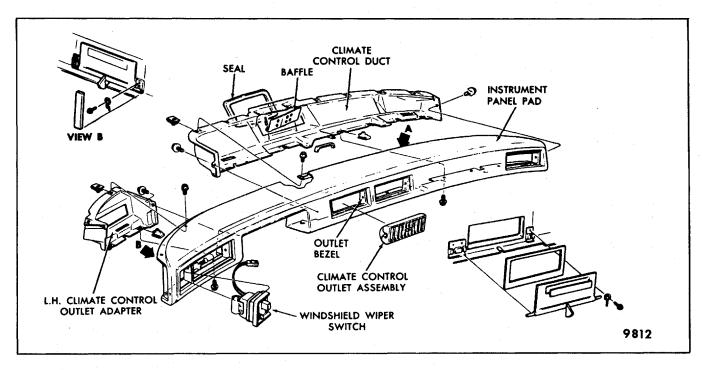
Windshield Wiper Switch Installation Cadillac E Styles
